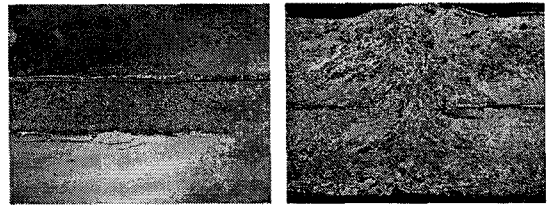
Weld defects for autogenous laser lap welding
